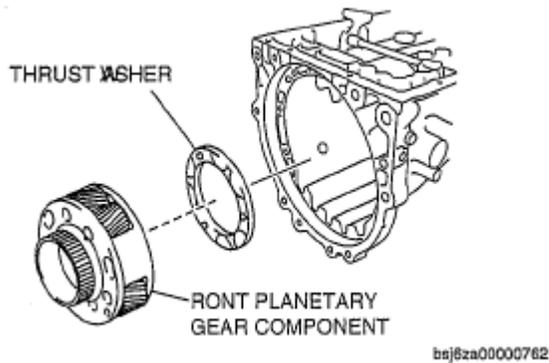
Identifying Planetary Gear Component And Thrust Washer
